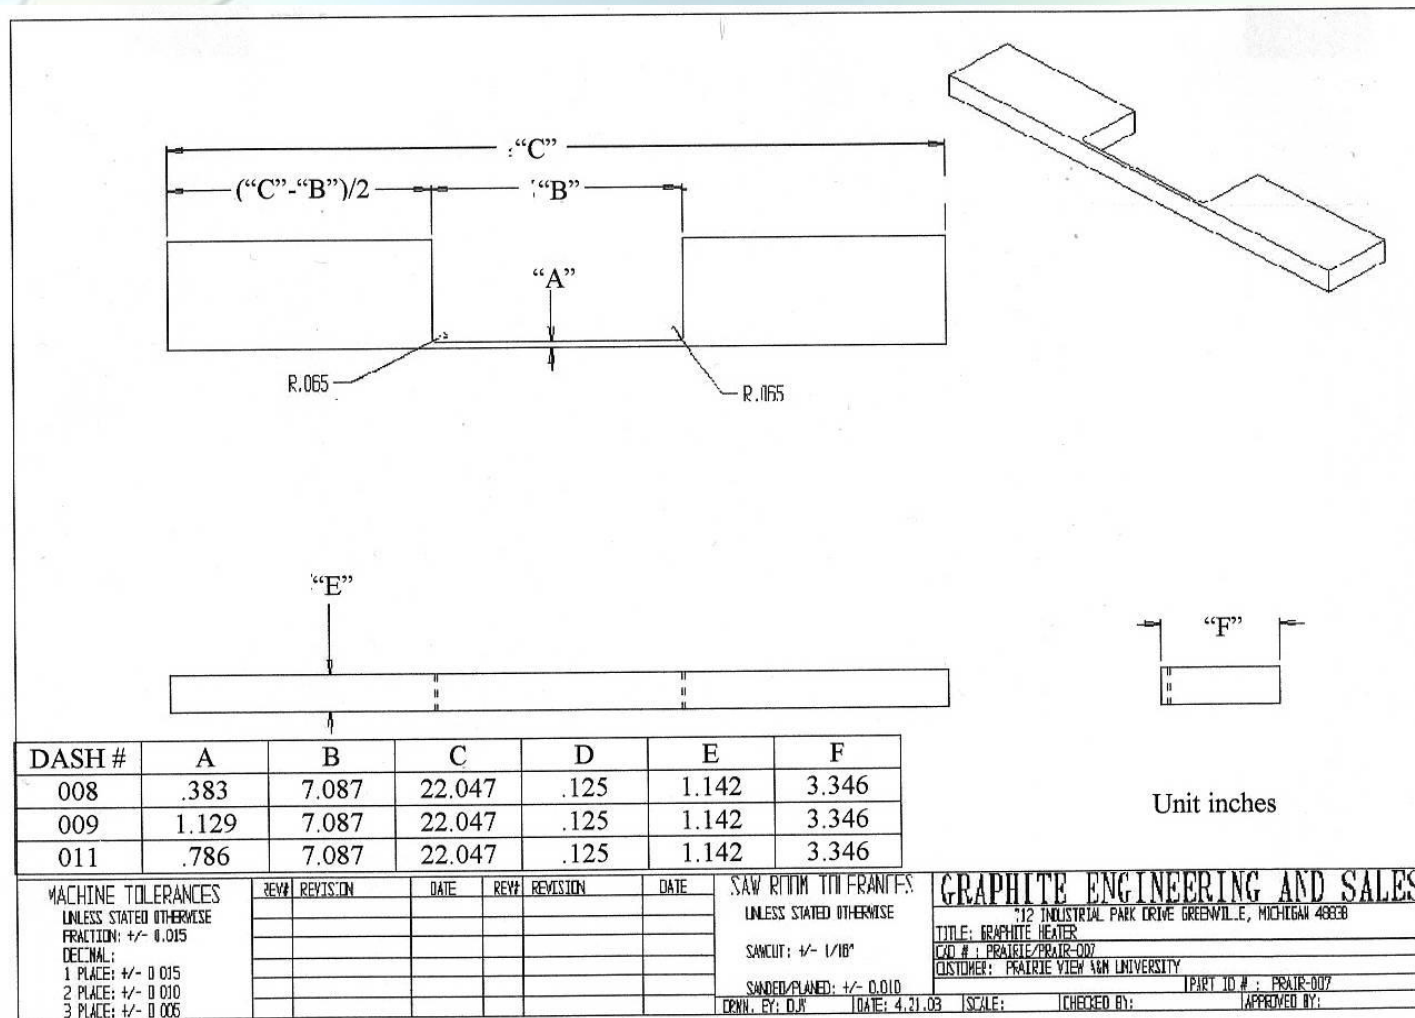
Manufacturer Specified Dimensions for Monoblock Heating Assembly Type Heaters
